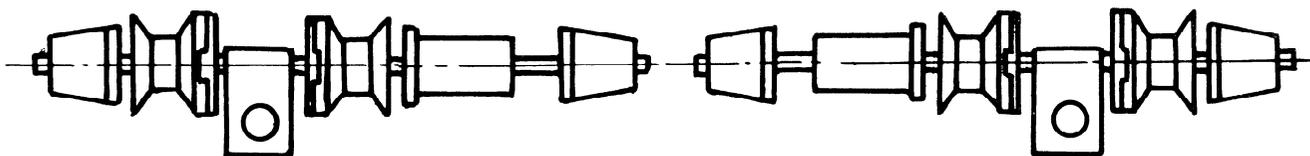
Type 4 — Double cable-lifter windlass with rope drum
